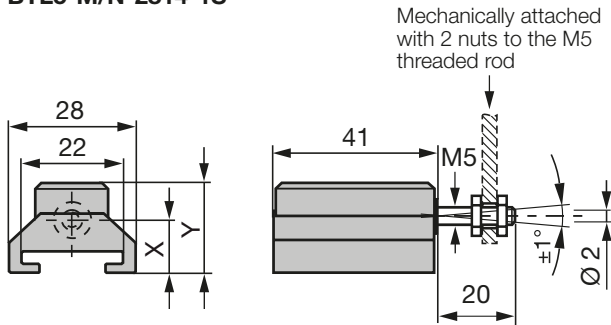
Installation dimensions of BTL5-M/N-2814-1S magnet
